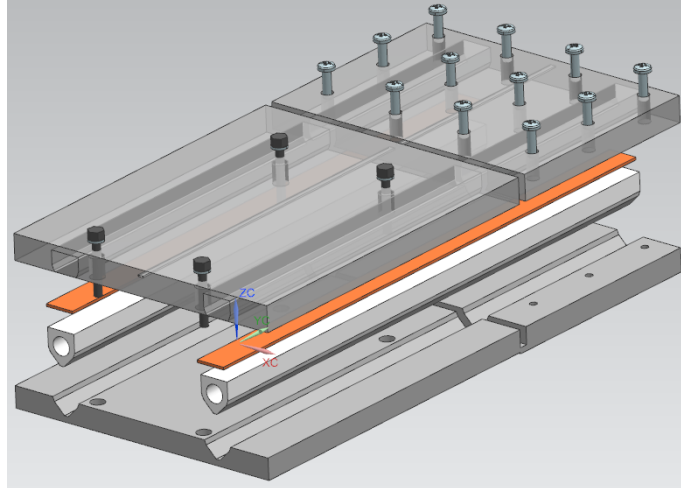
Exploded CAD model of cold plate including BN pipes, gauge 20 copper plate (.8mm thick), encapsulated by conventional manufacturing of 3 piece SLM aluminum alloy block (final envelope size is 100x185x18 cubic mm)
